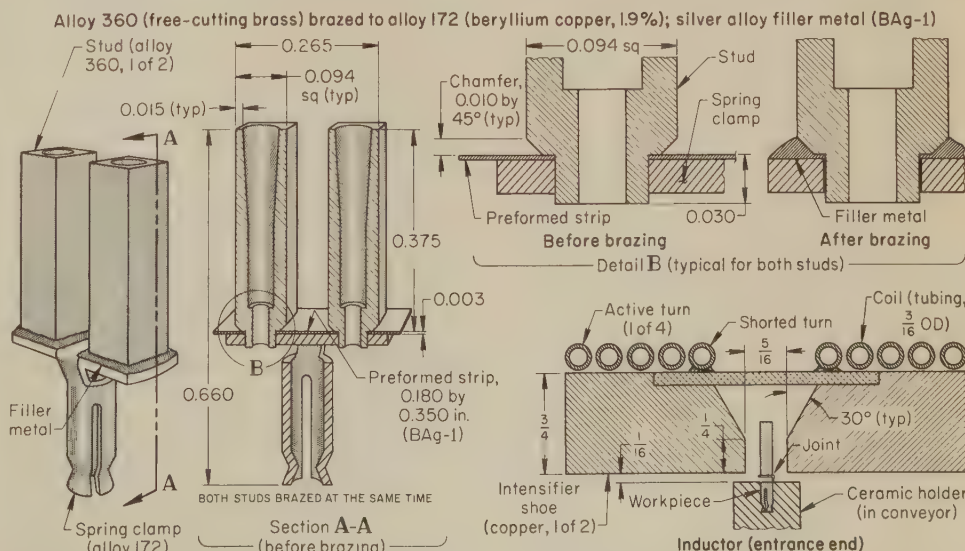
Connector assembly and (at lower right) section through inductor used for conveyerized brazing (Example 651)
